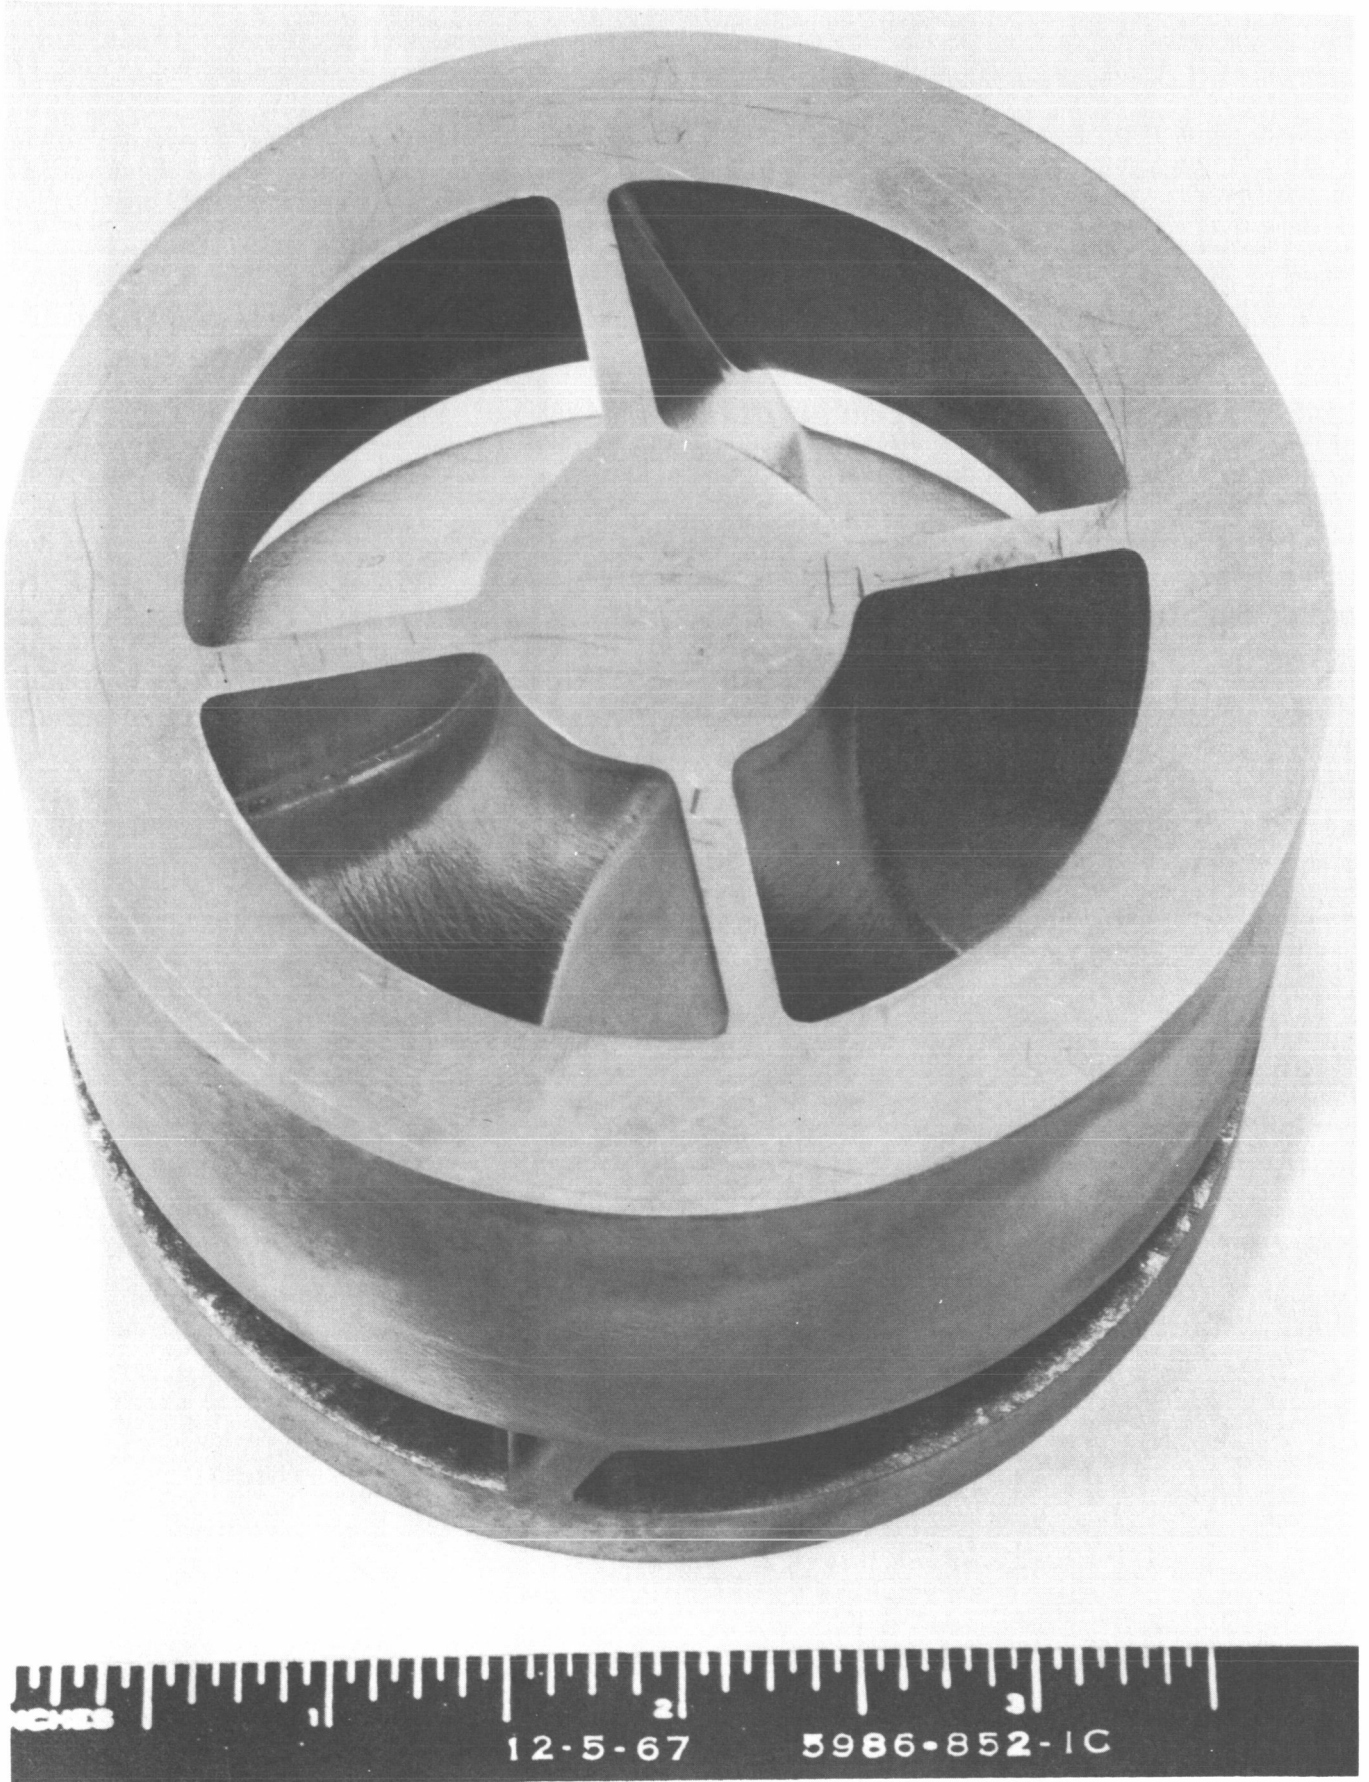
First Trial Sample After Final Chem-Milling - Eye Discharge View
